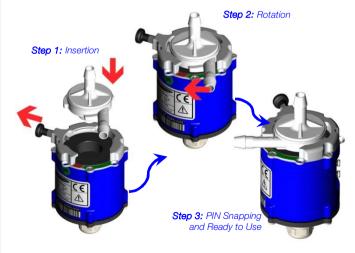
Intuitive 3-step pump head mounting procedure with bayonet type socket (PHS-i30.1)
